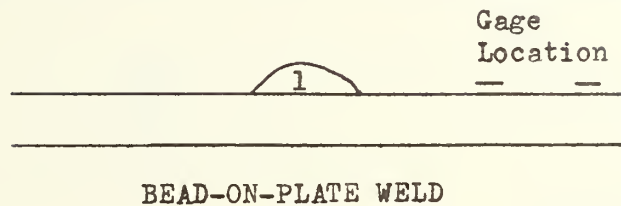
WELDING PASS SEQUENCE.
